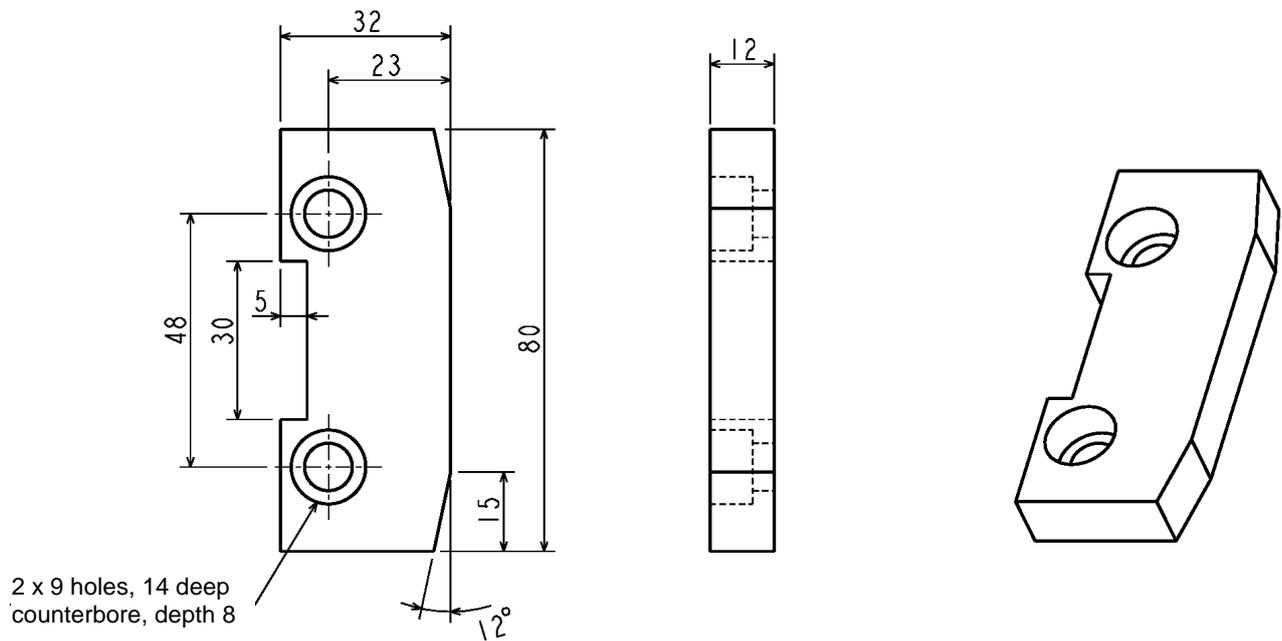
Example of changing the mechanical stopper for Axis 1
